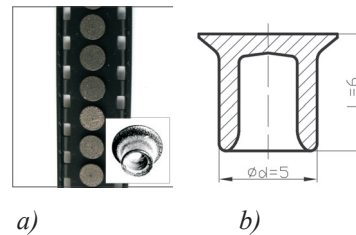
Used rivet; a) real appearance, b) major dimensions
